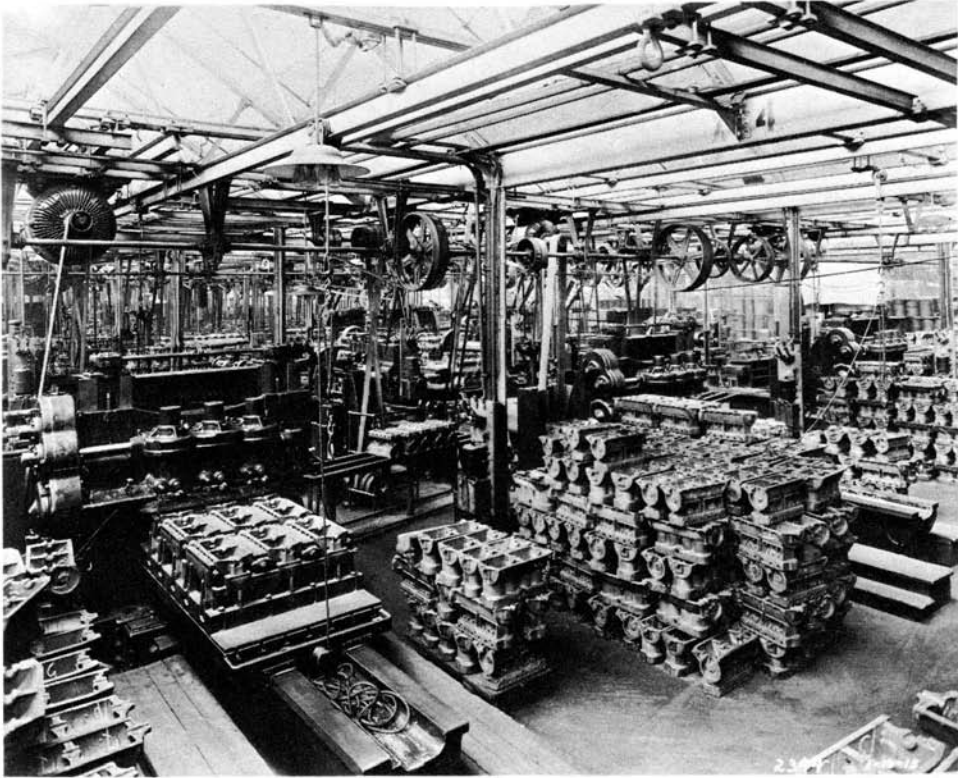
Machining Engine Blocks, 1915. Ford used multiple head milling machines to machine the blocks and the heads of the Model T engine. Special, easily loaded fixtures held fifteen blocks at a time for accurate machining. (Henry Ford Museum, The Edison Institute. Neg. No. 0-3927.)
